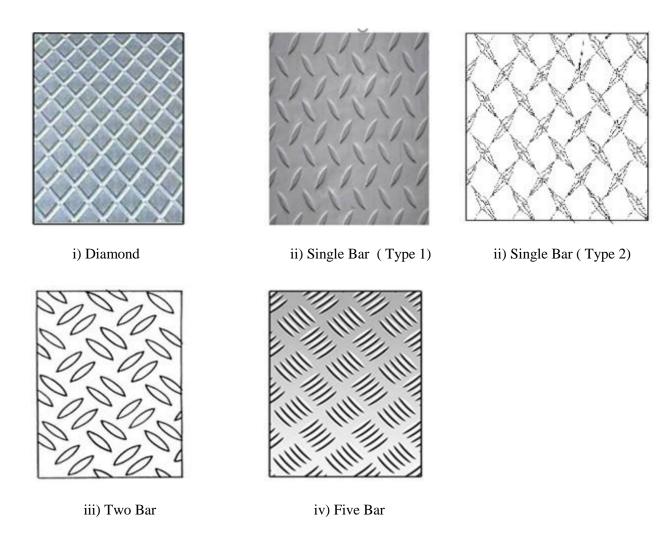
PATTERN OF THE CHEQUERED/TREAD SHEETS
